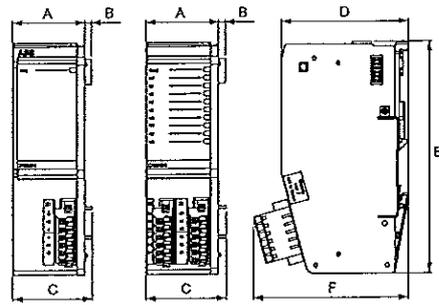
Dimension and mounting details of the PS24VPS160M/B/DEM5UR/ID4/AG/MA/SCM5/SCM3L modules
